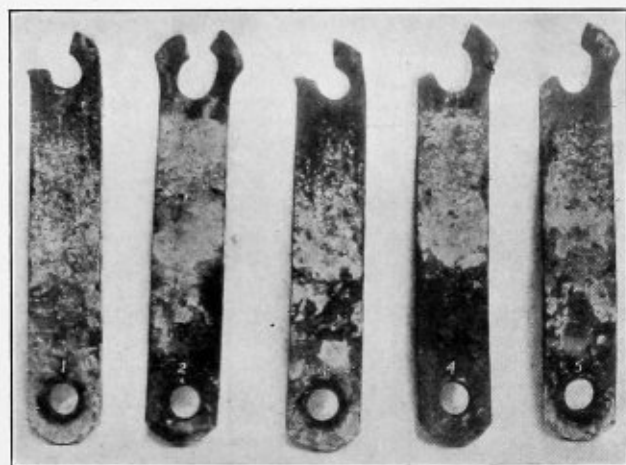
CROWN BAR SLING STAYS, SHOWING HOW THEY GAVE WAY
